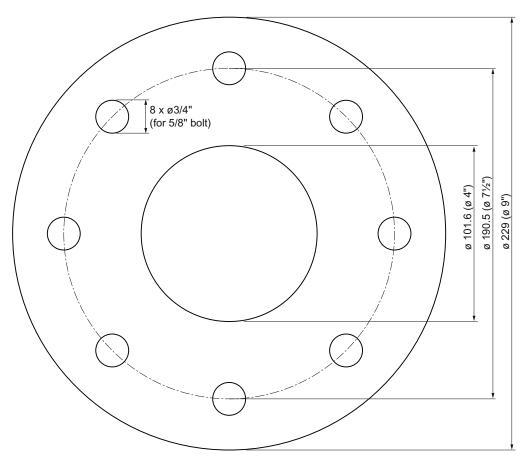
Dimensional drawing customer flange ANSI 4"/150 lb, all measures in mm (inches)
